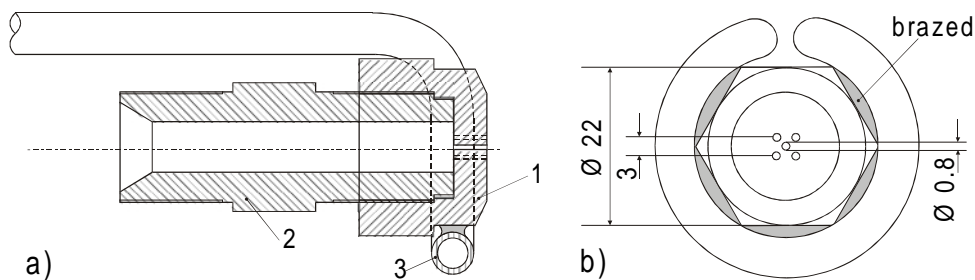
The burner head used for the thermal shock and thermal cycling tests: a) composite sketch with 1: copper end piece, 2: brass coupling piece with length of 50 mm, and 3: copper coolant pipe, $\text{Ø}6 \times 4$ mm; b) front view of burner head (dimensions in mm)
